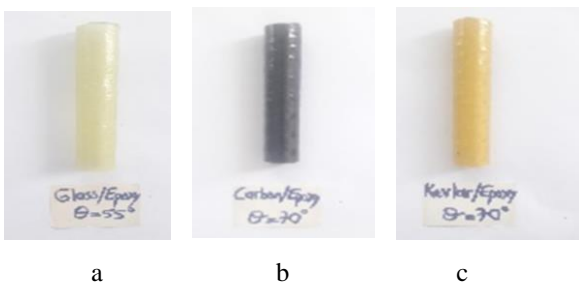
Test specimens of a) glass/epoxy, b) carbon/epoxy, c) kevlar /epoxy
